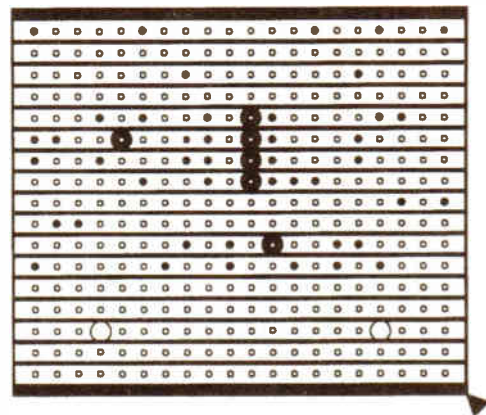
The underside view of the board will clearly show the positions of any breaks required in the copper strips.
